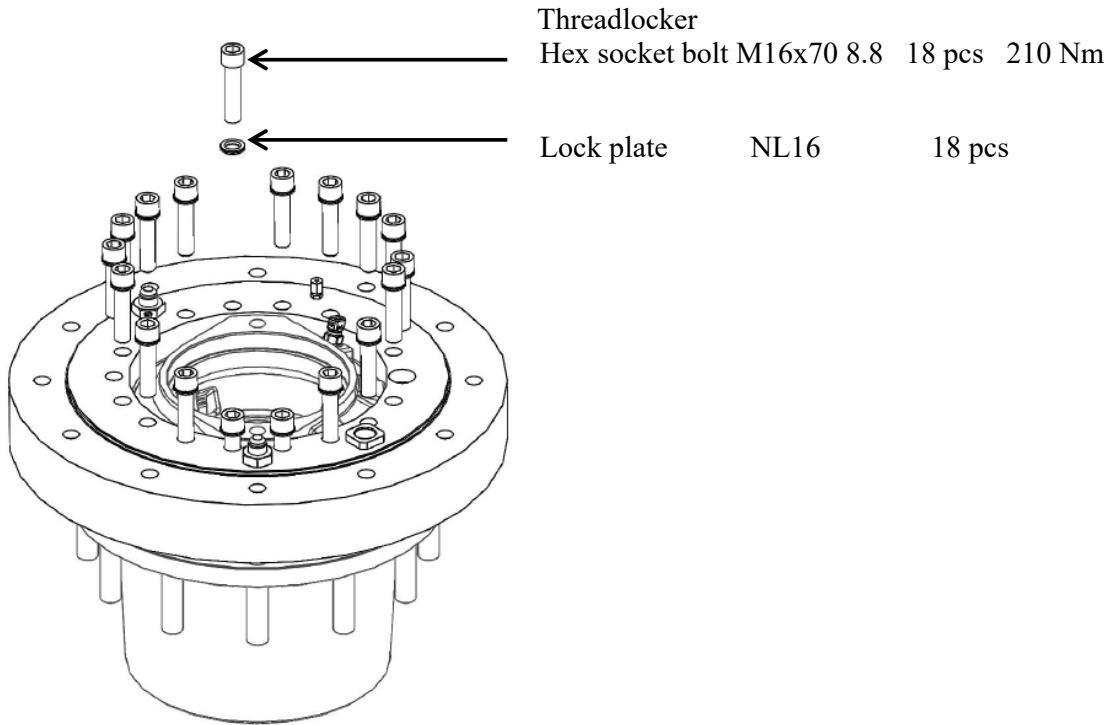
Removal of the planetary gear's mounting bolts from the frame flange.
